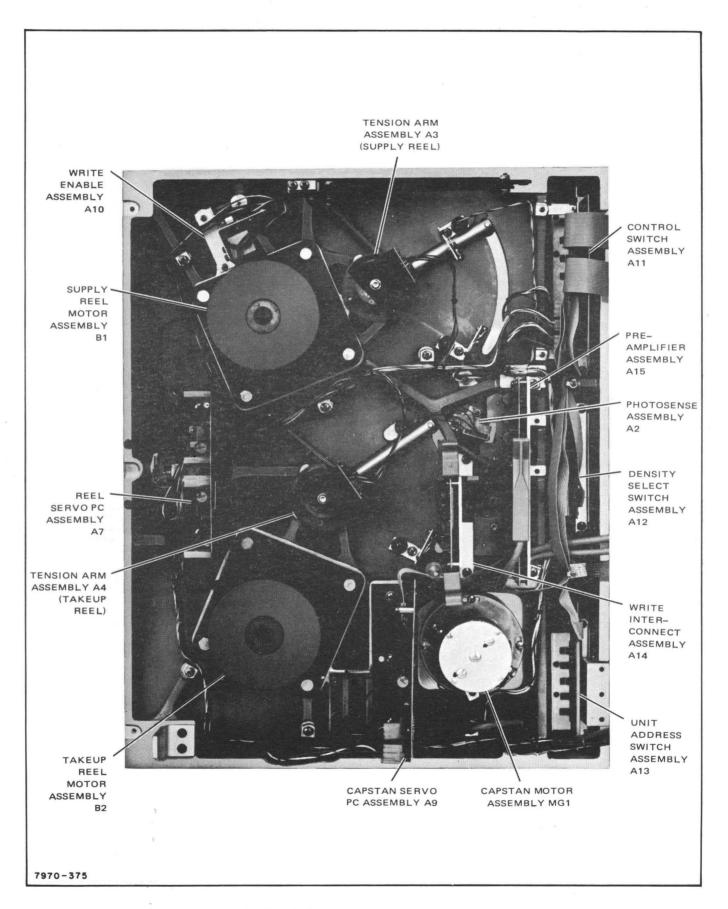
Tape Unit Assemblies, Main Casting (Rear View)
